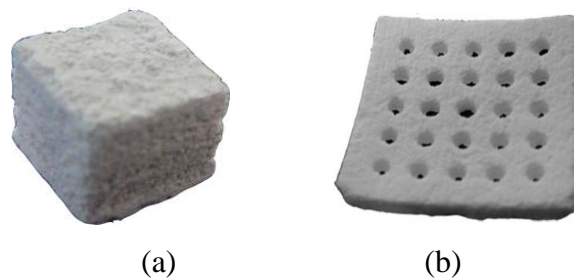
Photographs of 3D Printed specimens after removal from the powder bed
